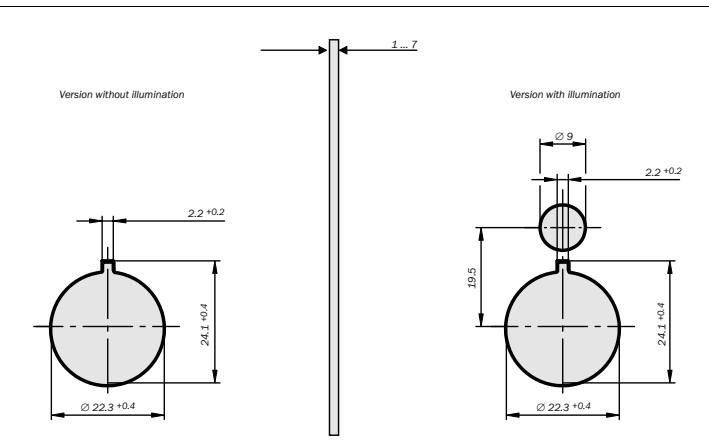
Dimensional drawings of the mounting holes for the built-in versions (mm)
